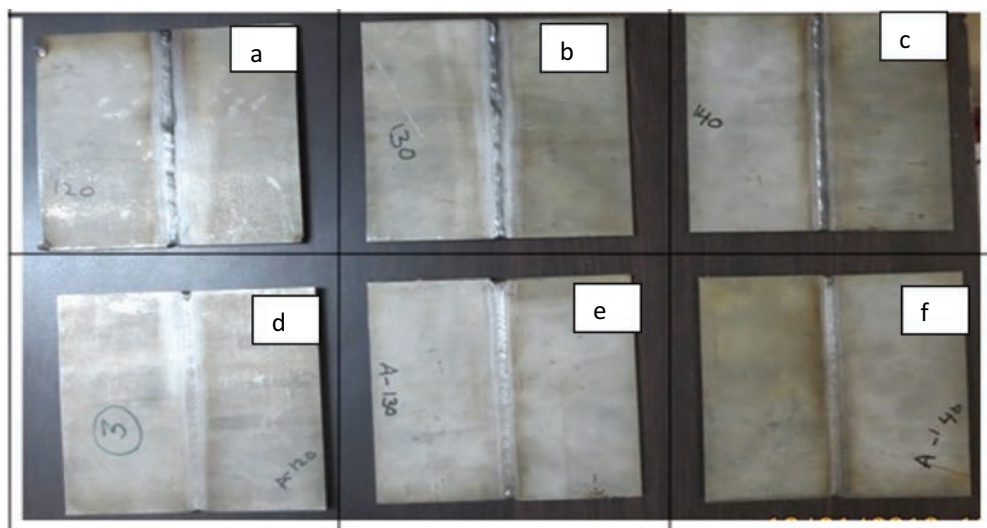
Plates welded with 308 L filler (A: 120A weld, B: 130A weld, C: 140A weld) and autogenous welding (D: 120A weld, E: 130A weld, F: 140A weld).
